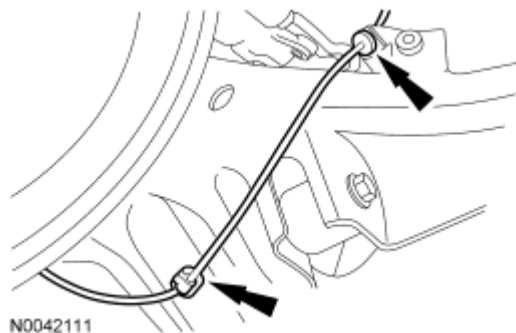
Locating Wheel Speed Sensor Harness From Trailing Arm
